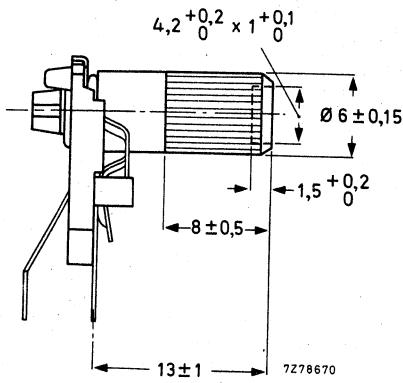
Test switch for vertical mounting with adjustment knob at the side of the selector contact.
